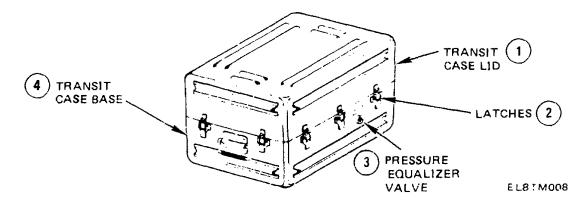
Packing the Electronics Assembly, Control Panel, or Technical Manual.
